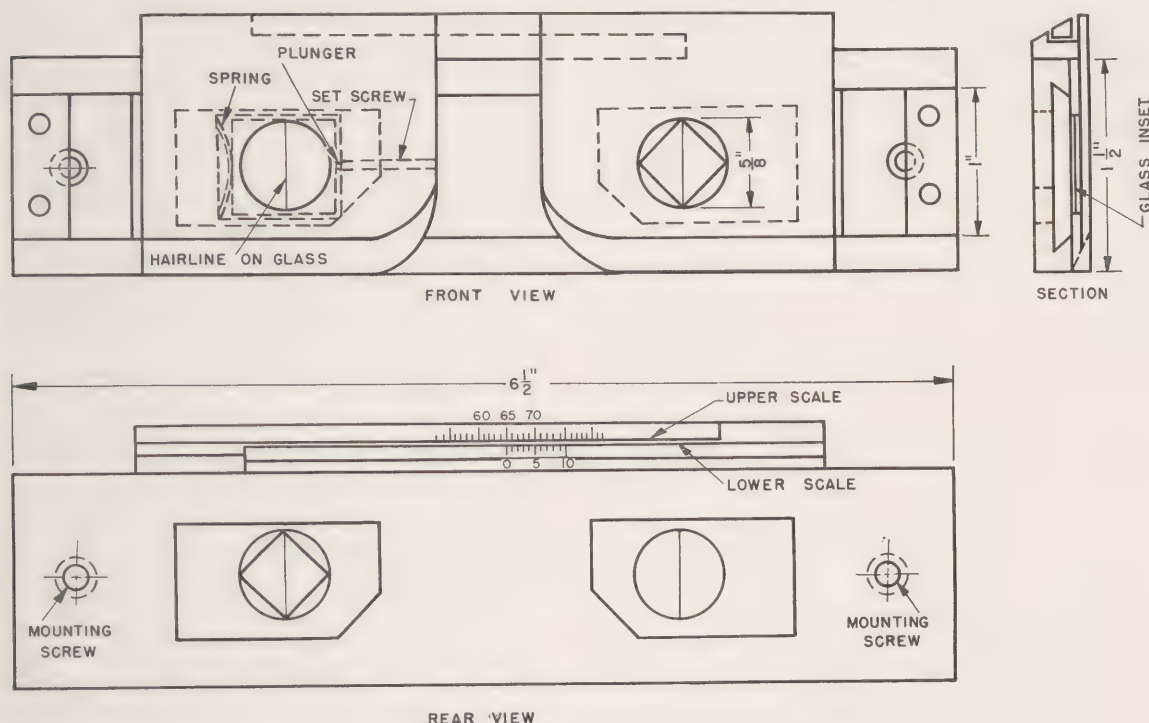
NDRC interpupillometer: eyepiece assembly details.
